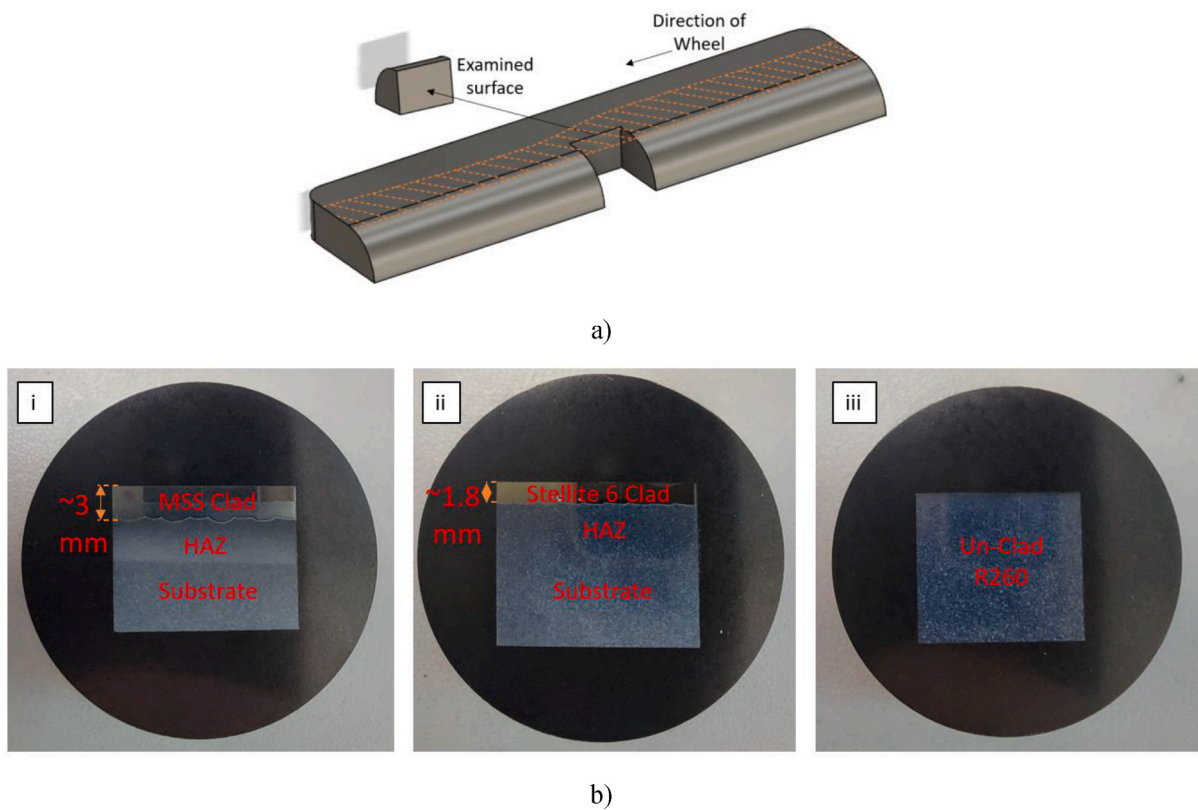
Pocket specimen sectioned parts: a) Examined surface of contact path; b) Clad layer dimensions and materials.
